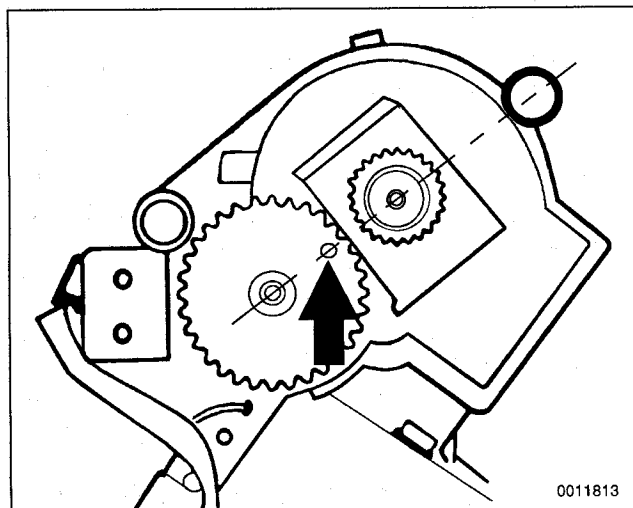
Sunroof motor in "closed" position. Hole (arrow) in large gear aligns with shafts on both gears (to mid-1994).
